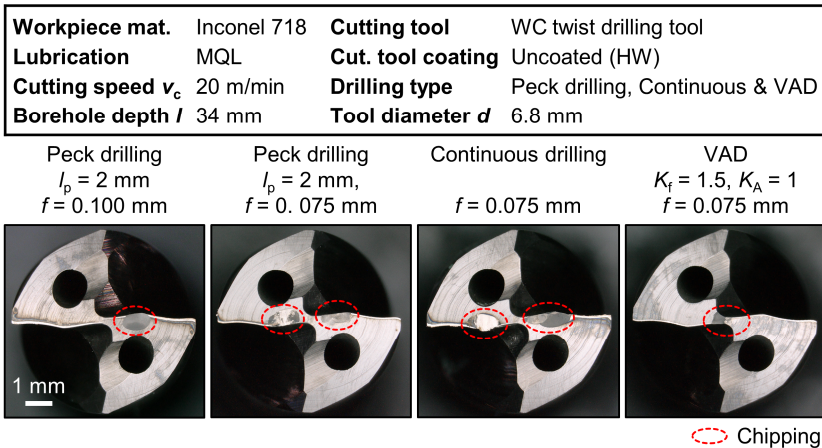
Examples of cutting edge chipping onset and its location in peck drilling, continuous drilling and VAD
